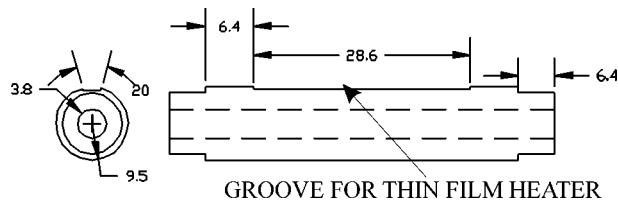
Drawing of thin film azimuthal heat transfer sensor (Dimensions in mm)
